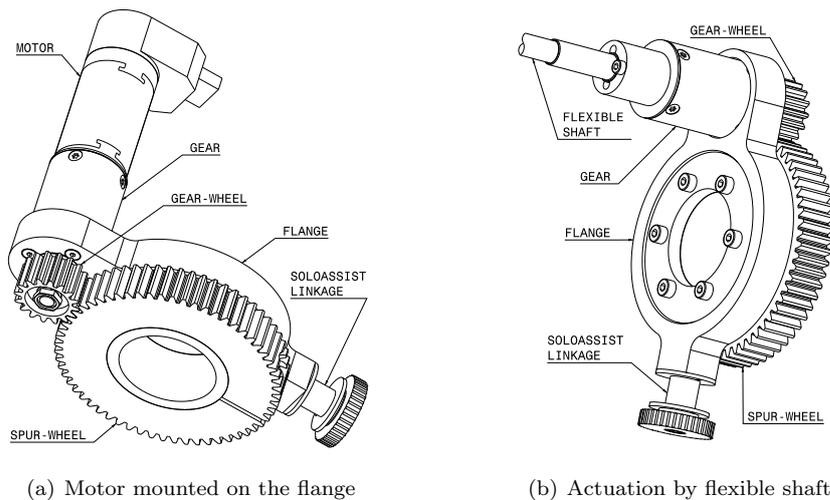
Concepts of the rotation for the single-port platform: a) Direct drive by attaching the motor on the flange b) Actuation at the periphery by using a flexible shaft
